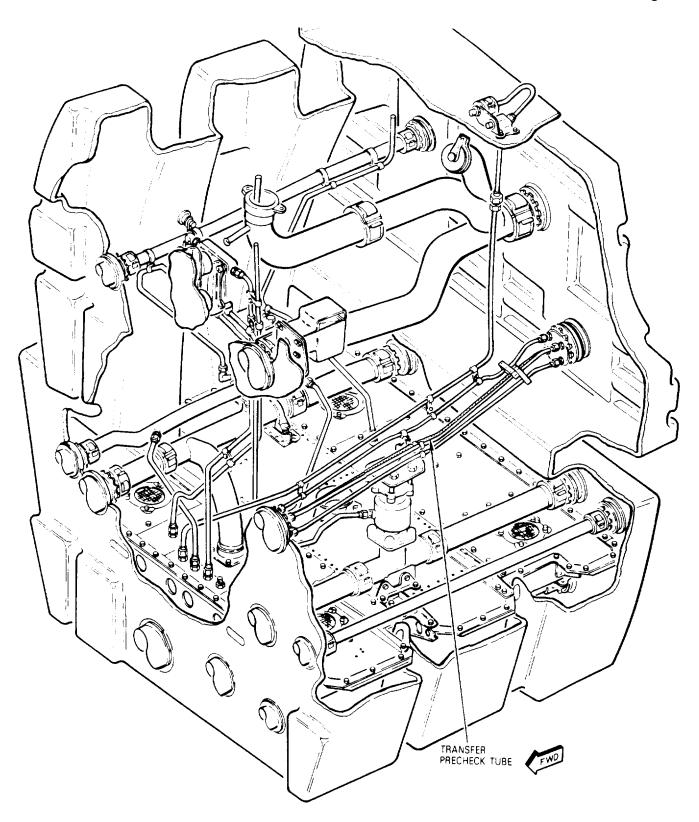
No. 4 Fuel Tank Transfer Test Troubleshooting Component Locator (Sheet 1 of 6)
